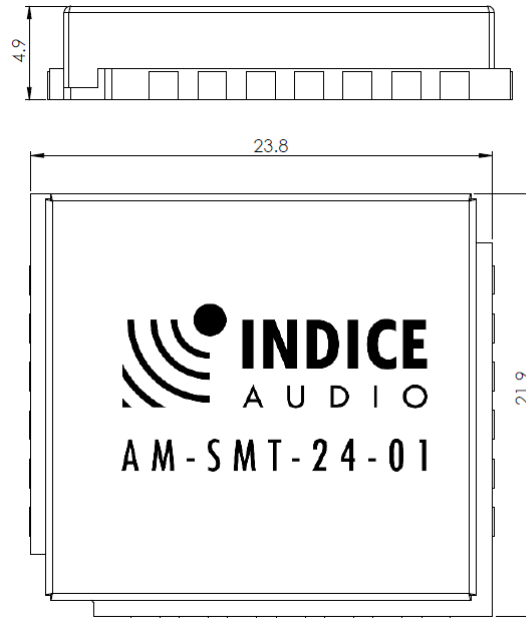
Package details. All noted dimensions in mm. Not to scale.
